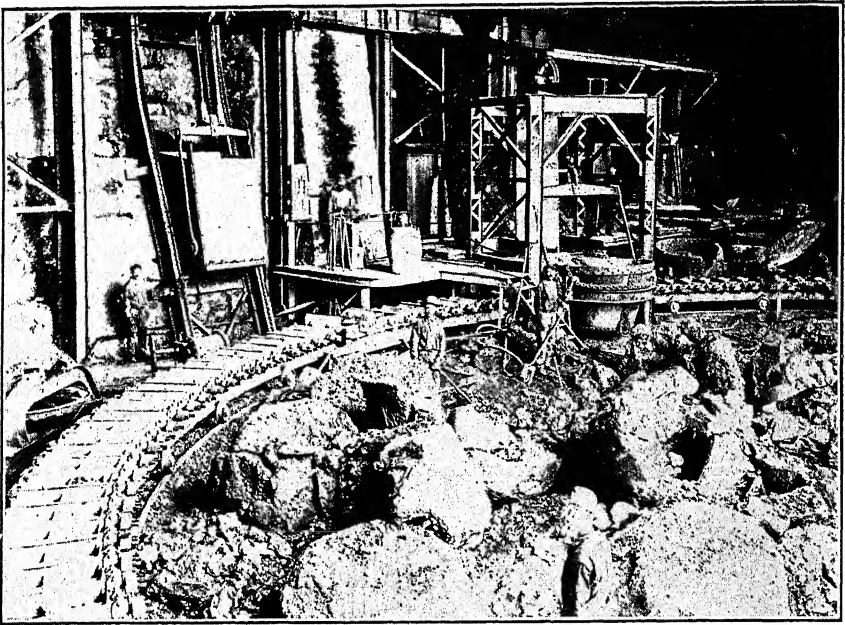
MACHINE FOR CASTING MOLTEN SLAG EQUIPPED WITH SPECIAL POURING LADLE.
